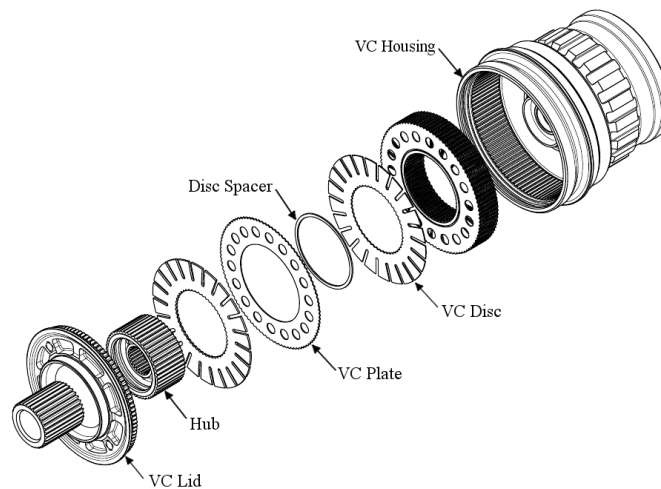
Viscous Coupling (VC) unit (exploded view) [121]
